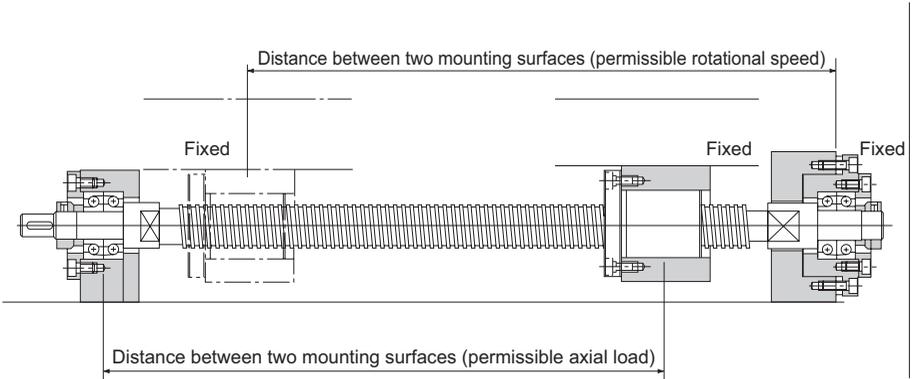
Screw Shaft Mounting Method: Fixed - Fixed
